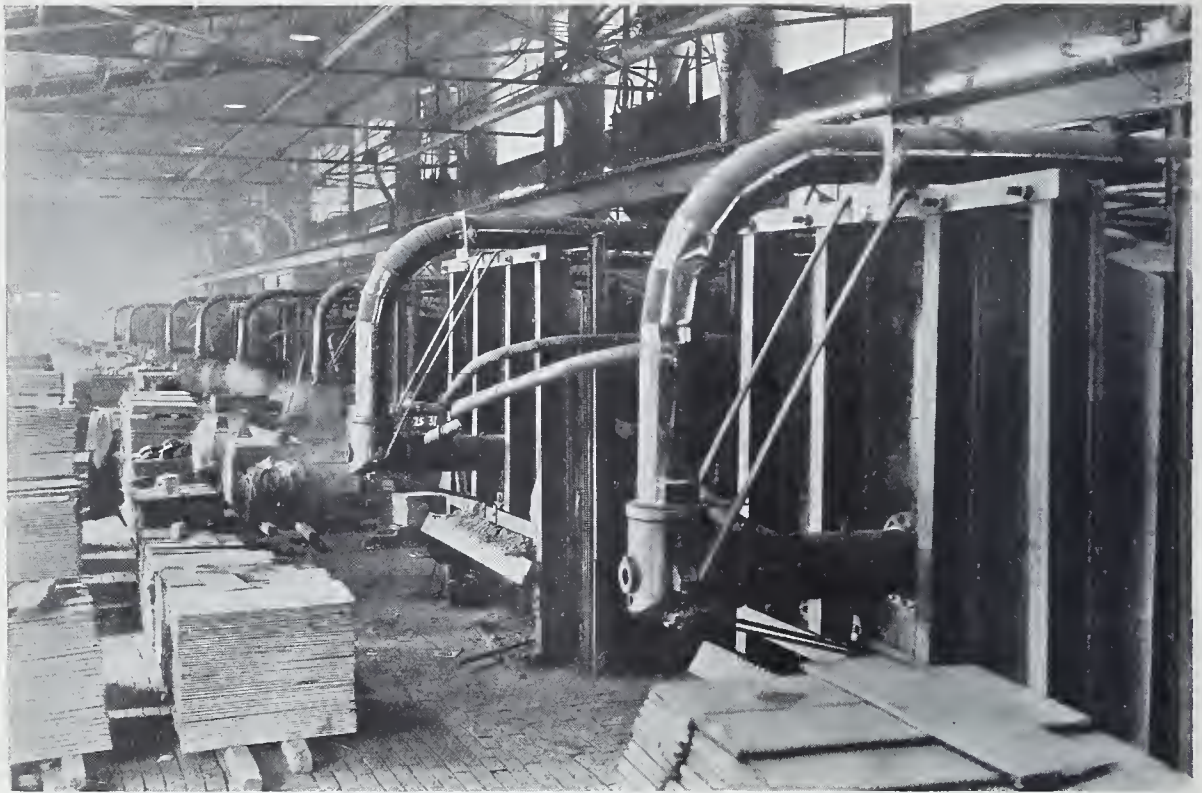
QUIGLEY BURNERS AT REAR OF EIGHT DOUBLE-CHAMBER SHEET AND PAIR FURNACES.
